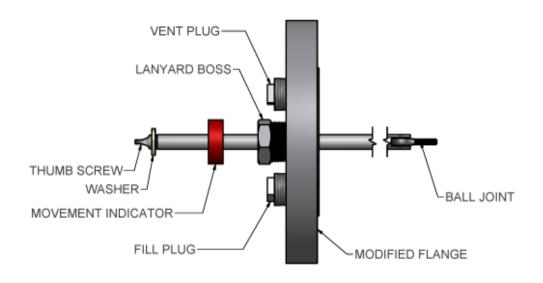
Modified Blind Flange with Optional Lanyard Assembly
